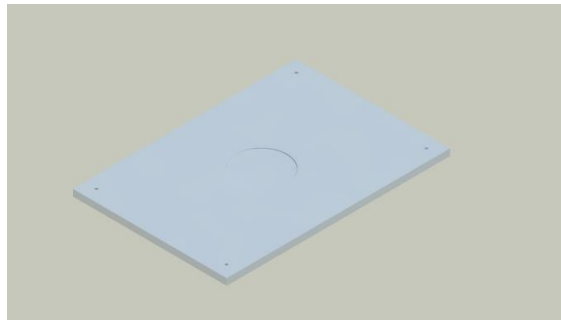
Isometric view of rectangular box sensor (Bottom plate)
